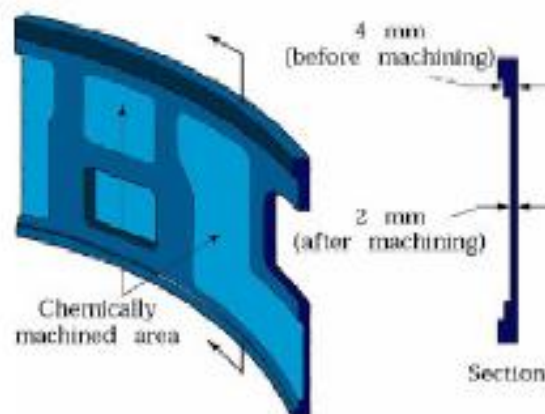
Missile skin-panel section contoured by chemical milling to improve the stiffness- to- weight ratio of the part (Kalpakjain & Schmid)
